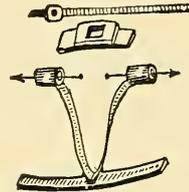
The different parts of the strong mechanism, enlarged (A).
